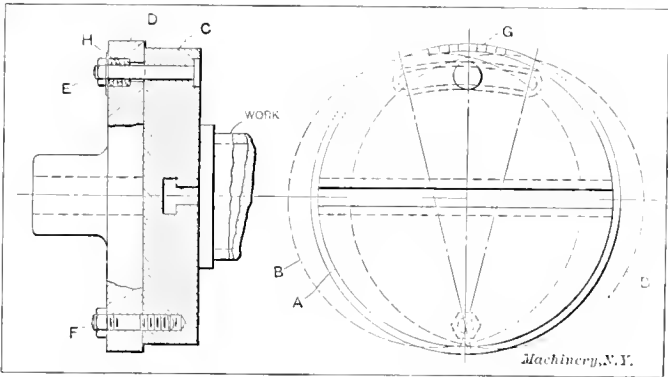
Special Lathe Face-plate for Turning Eccentric Rings, etc.
